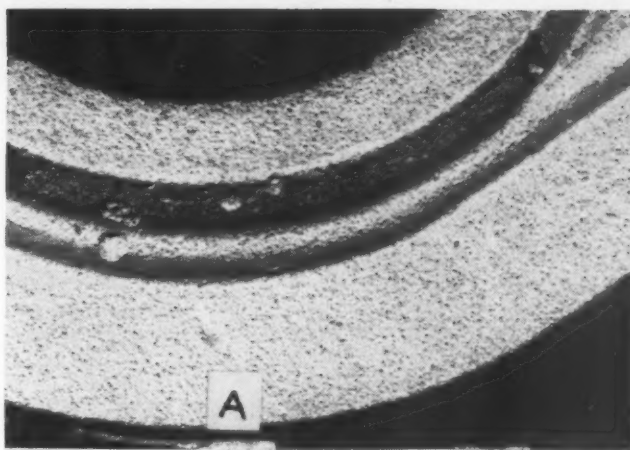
Slag inclusion due to improper pouring. Casting gated at A. x1
